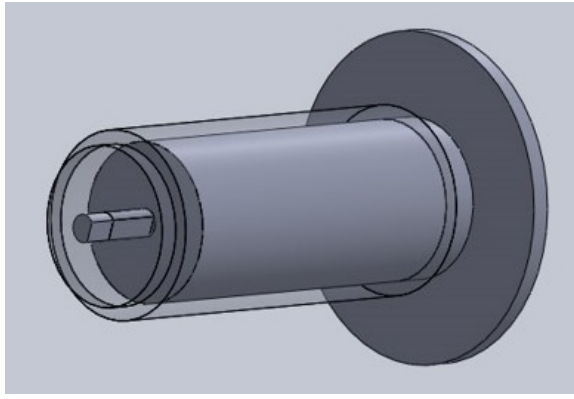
Sleeve Attaches To Motor for Later Mounting
